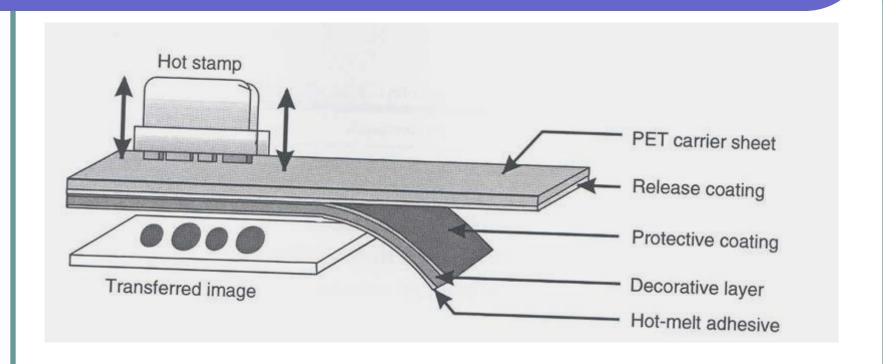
Hot stamp printing uses a heated die that has the image engraved into its surface
